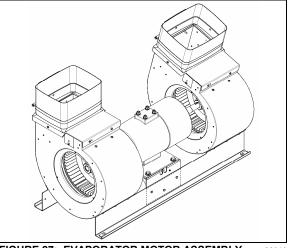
EVAPORATOR MOTOR ASSEMBLY 22316
